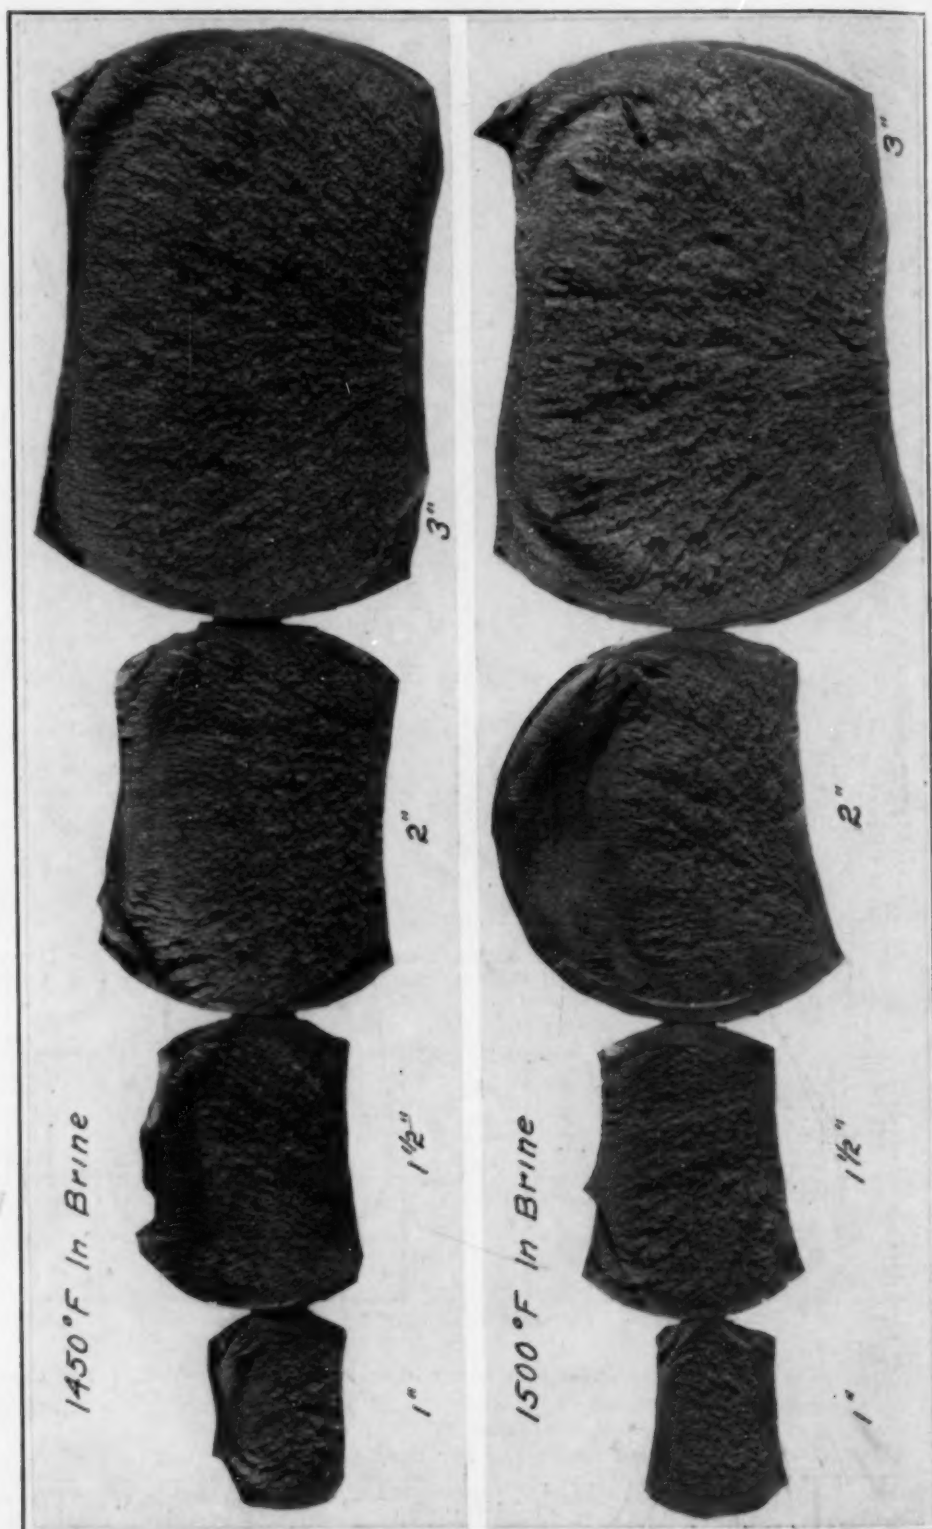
Fracture Grain Size of Quenched Carbon-Vanadium Tool Steel.
